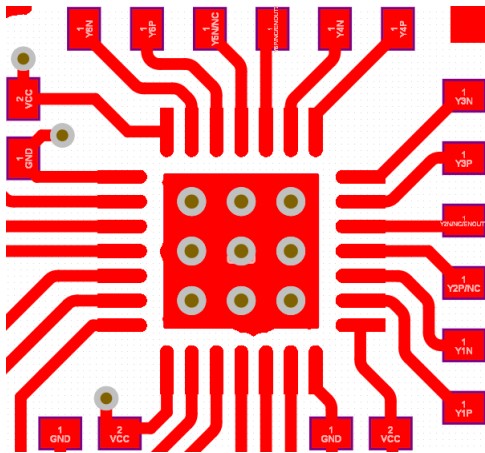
PCB Layout Example for LMK1D2104L, Top Layer
